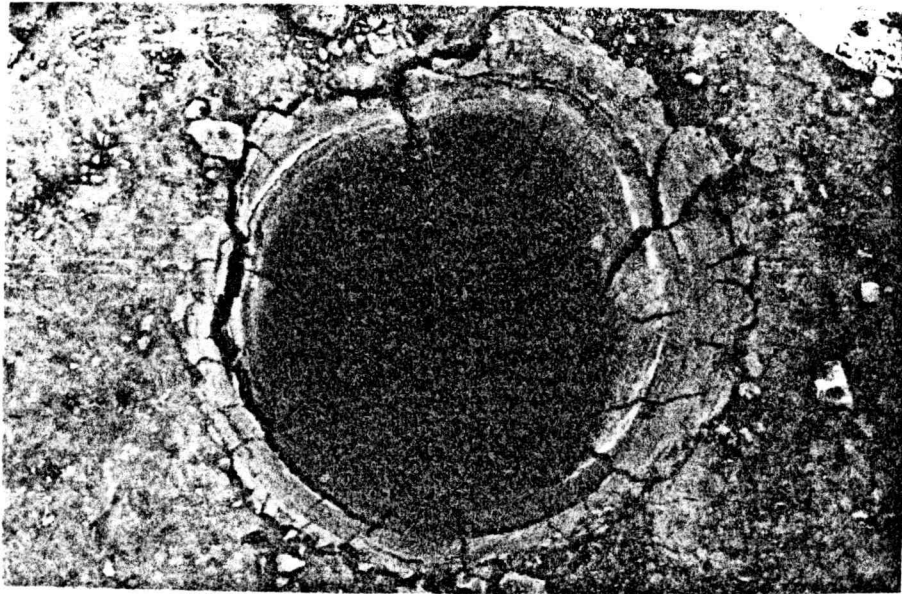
Formed Pot in Ungreased Ground Mould Showing Cracking Due to Shrinkage.
